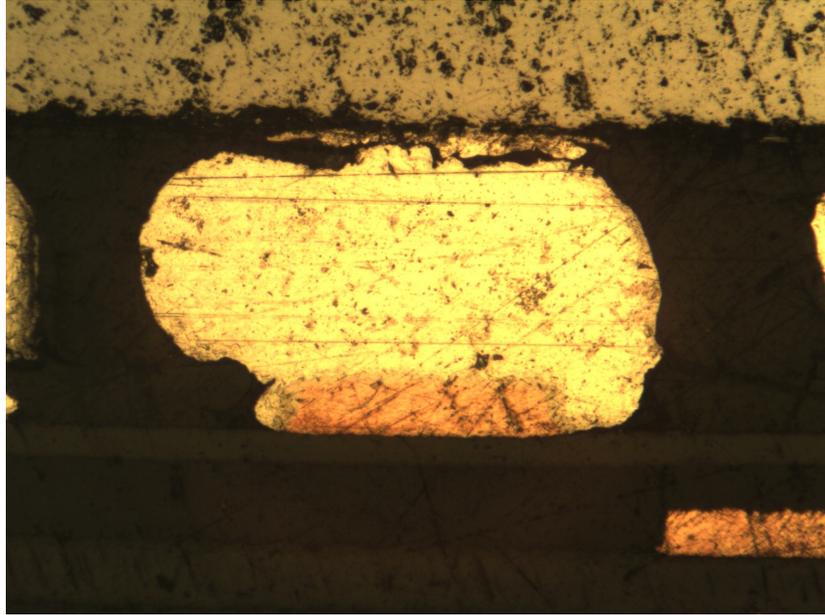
Hot Melt 1 on FR4 Test Board CSP Image
